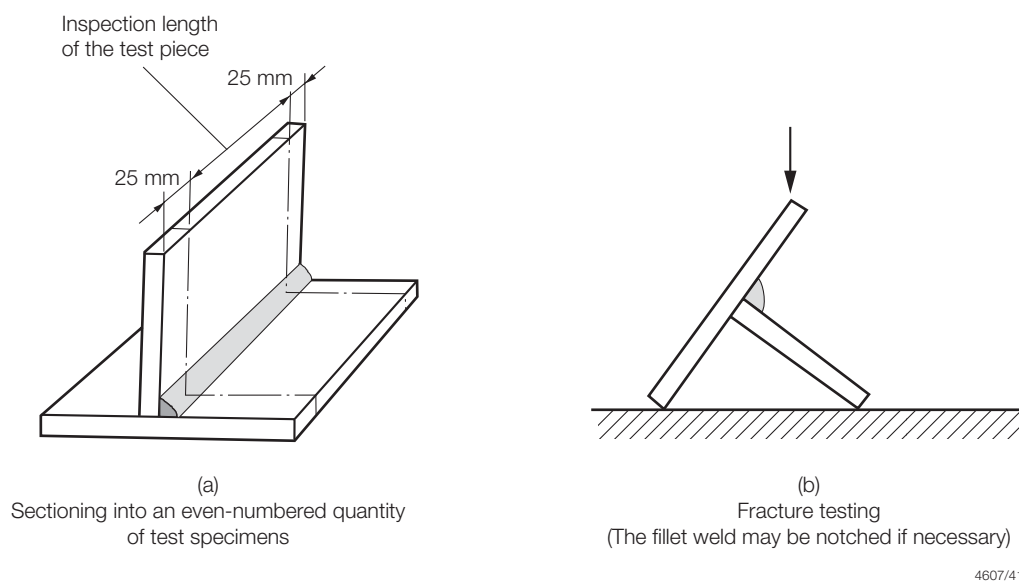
(a) Preparation and fracture testing of test specimens for a fillet weld in plate
